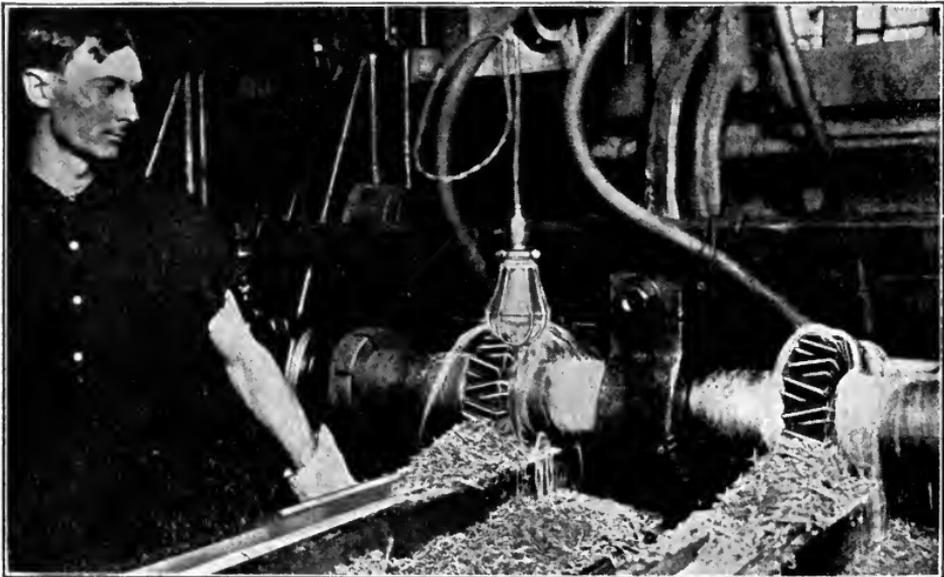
Ingersoll Horizontal Miller Doing Heavy Milling
